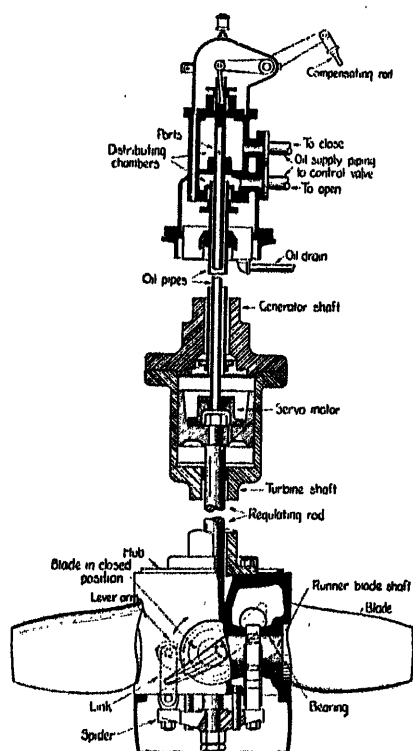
HUB CASTING OF AXIAL FLOW TURBINE WHEEL
